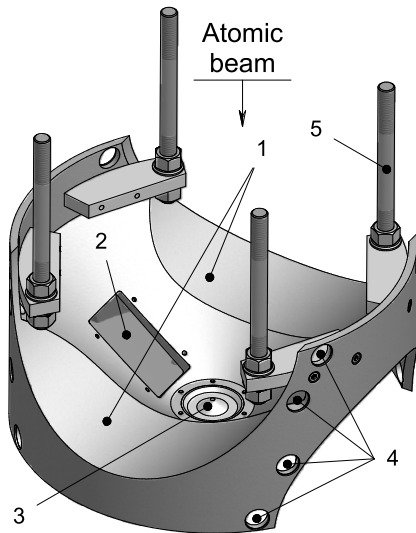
3D drawing of the upper baffle, separating the vacuum chambers I and II, with the two wide cuts in front of the turbopumps (1) and the openings for the viewport (2), the skimmer (3), four of the 16 ball bearings (4) and the four supporting rods (5).
